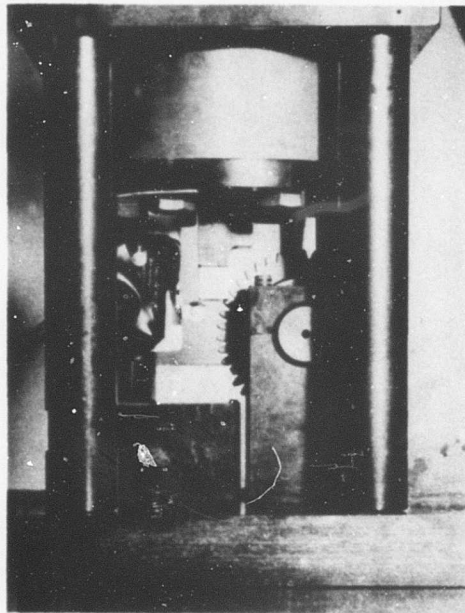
Tooth Loading Arrangement on Single-Tooth Gear Tester.
